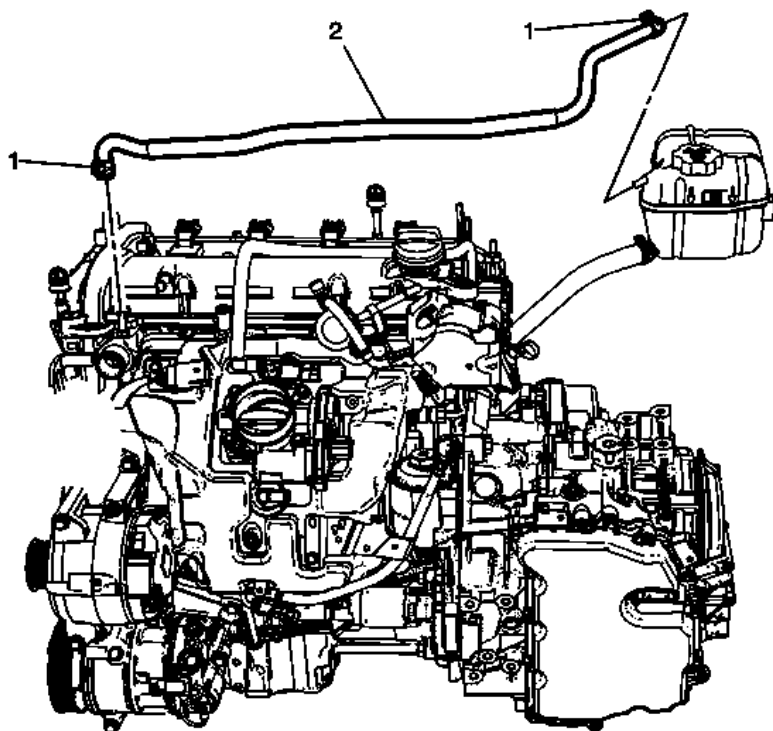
Radiator Surge Tank Inlet Hose (LEA)
